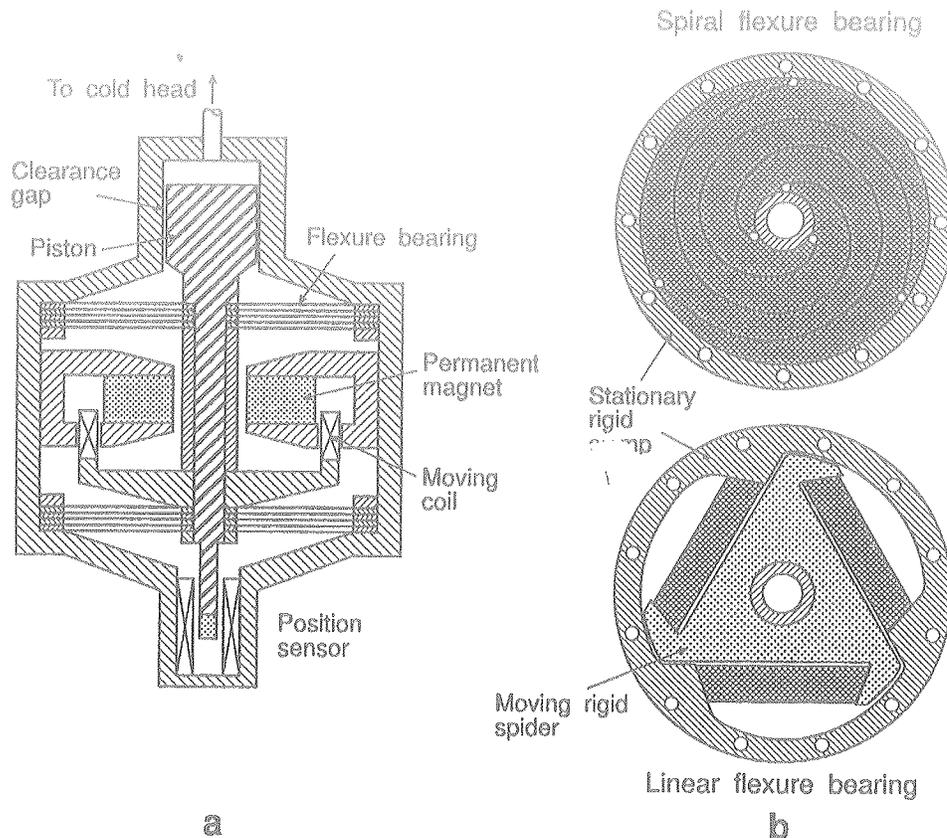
(a) Cross-section of the Oxford-style linear compressor showing the use of flexure bearings. (b) Two types of flexure bearings.
